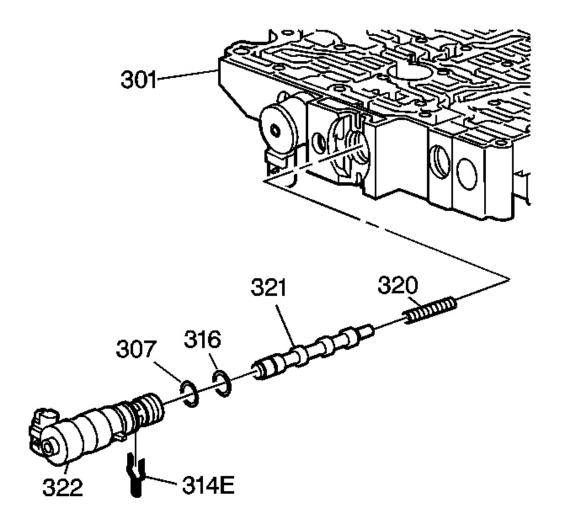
View Of PC Solenoid Valve & Torque Signal Regulator Valve Courtesy of GENERAL MOTORS CORP.
